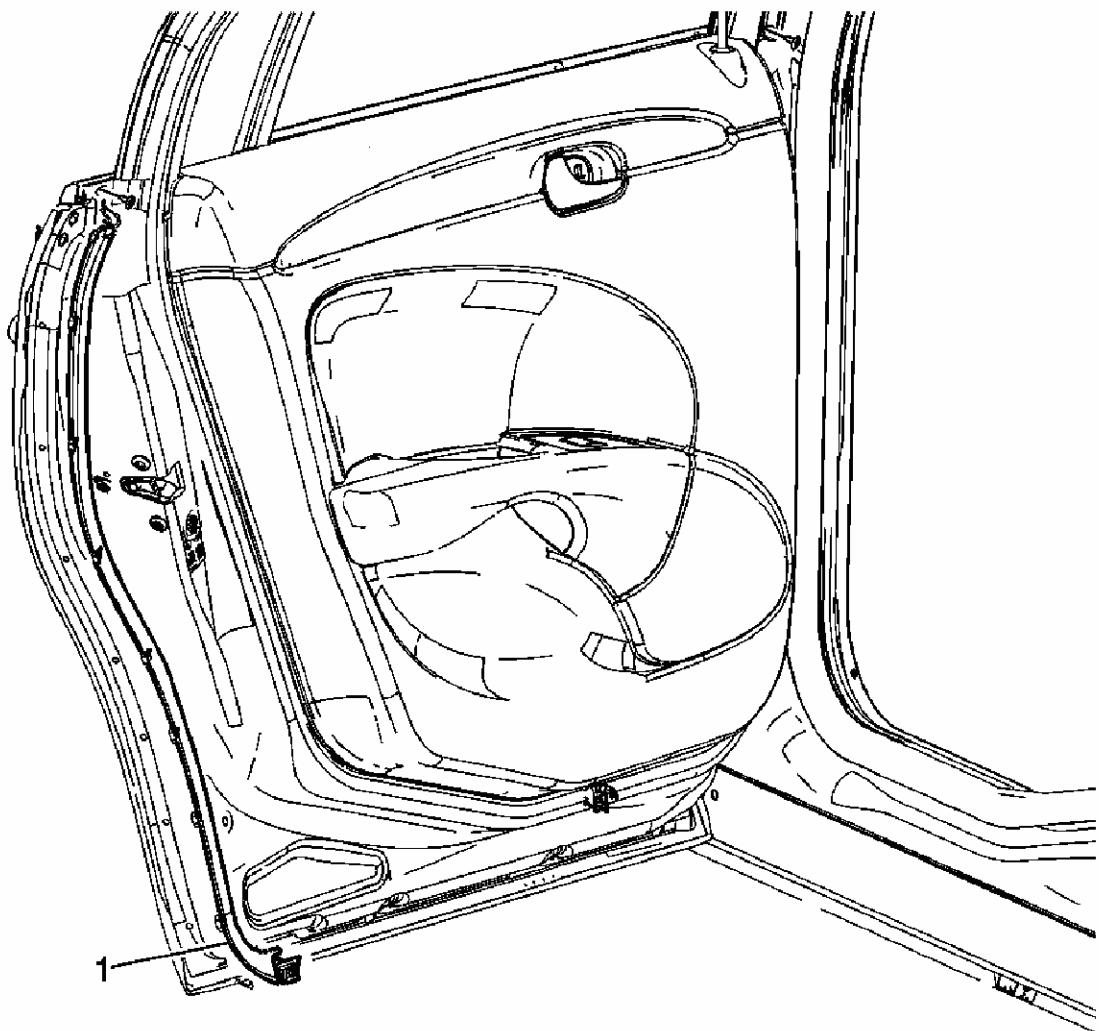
Identifying Rear Side Door Bottom Auxiliary Sealing Strip
